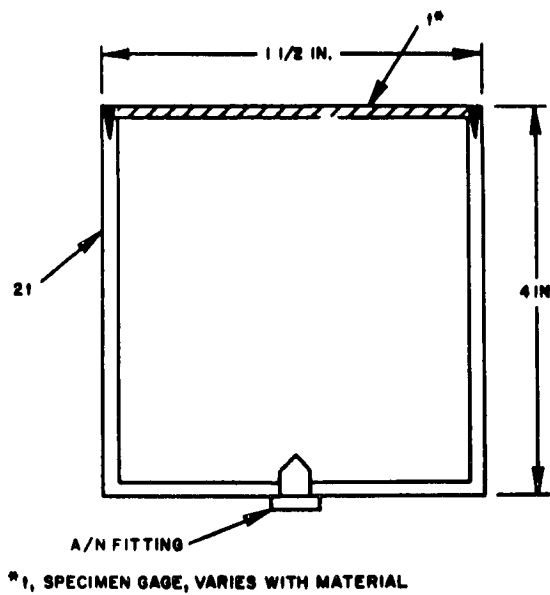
Cross-section of pressure vessel design suitable for welding.
